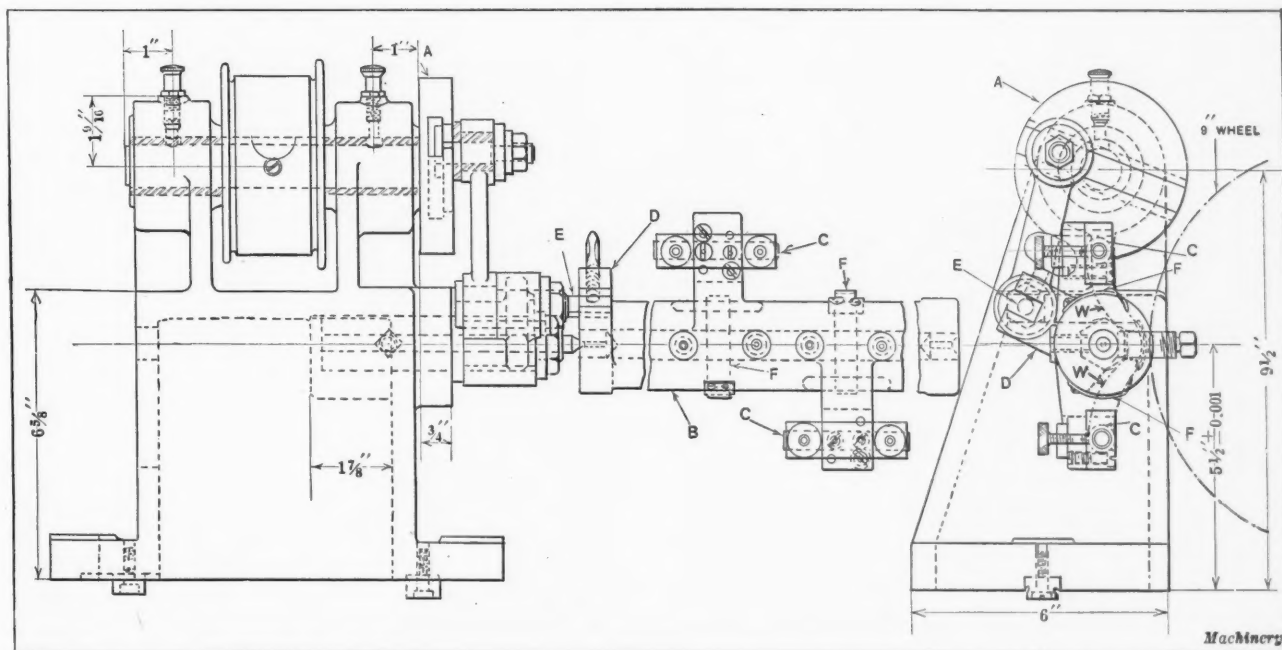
Assembled View of the Special Head and Grinding Fixture employed on the Machine shown in Fig. 1
